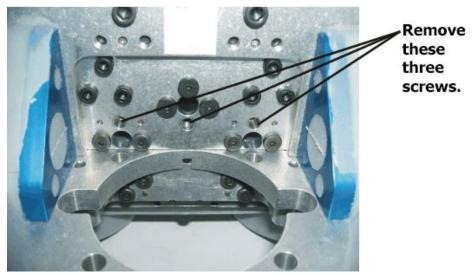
Remove #10-32 x 1/2 long low head cap screws
